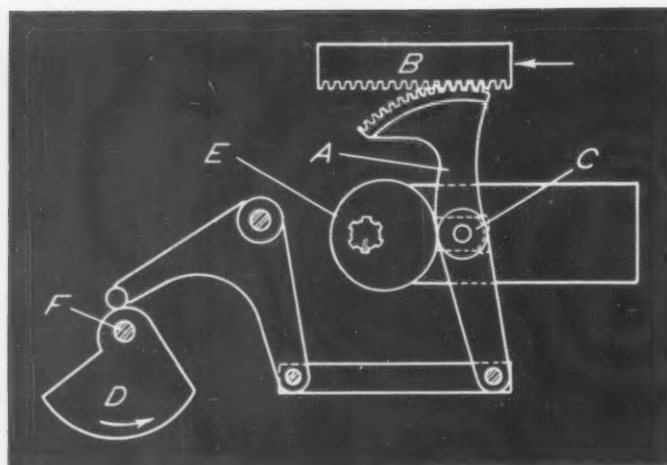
Details of the rapid pull-out arrangement on an automatic screw machine for withdrawing drill to clear chips and lubricate point.
